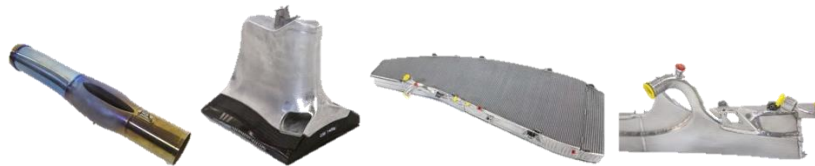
Parts of exhaust components in a Formula 1 cars [29,30].
